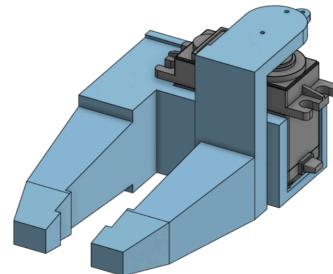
CAD model for low fidelity end effector prototype. Simple gripping mechanism should be sufficient for most tasks during Extreme Delivery and Equipment Servicing missions.
